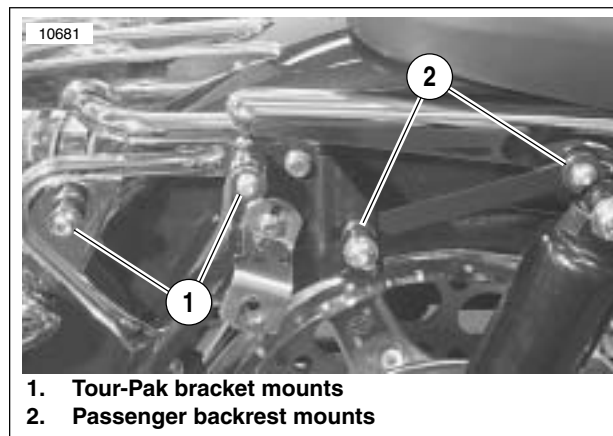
Passenger Backrest and Tour-Pak Docking Locations
